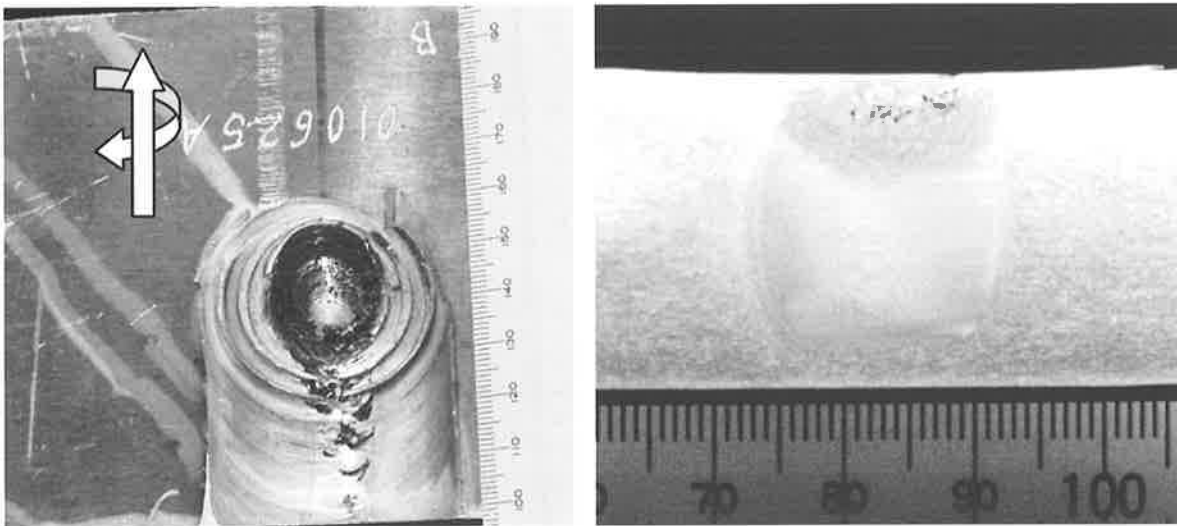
Weld 625A top view left and weld macrograph right demonstrating the small sub-surface voids.
